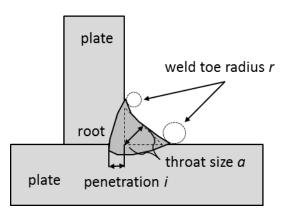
Toe radius, throat size, and penetration on a fillet weld.
